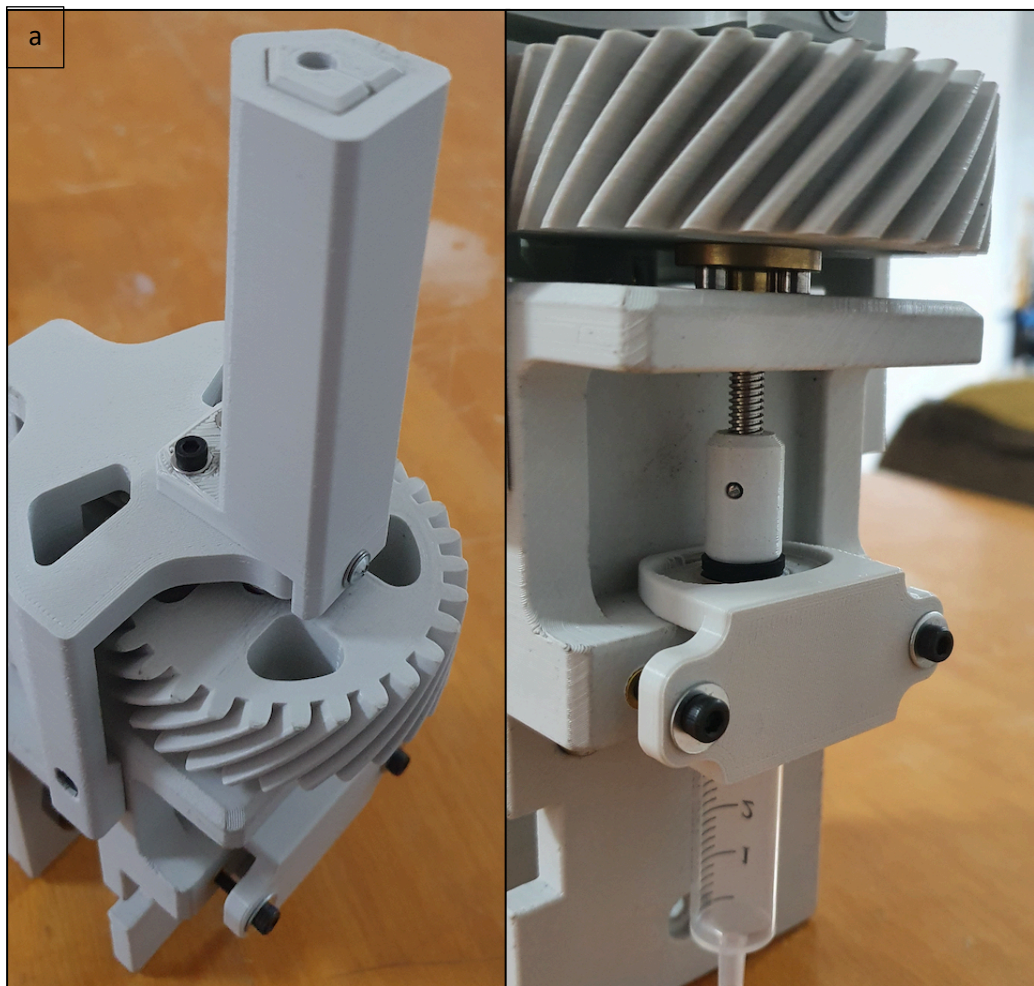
a) First physical assembly of the mechanism. b) Focused view for syringe attachment and calibration
